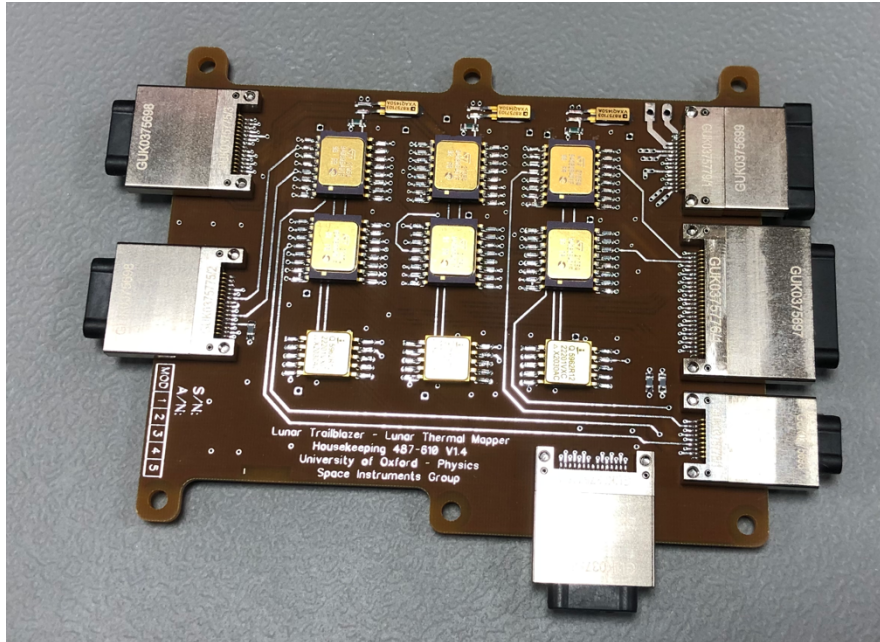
One of the LTM flight housekeeping boards ready for testing. Each of the electrical mounting points has a connector so that the test resistors can be plugged and unplugged without touching the flight board's connection points.
